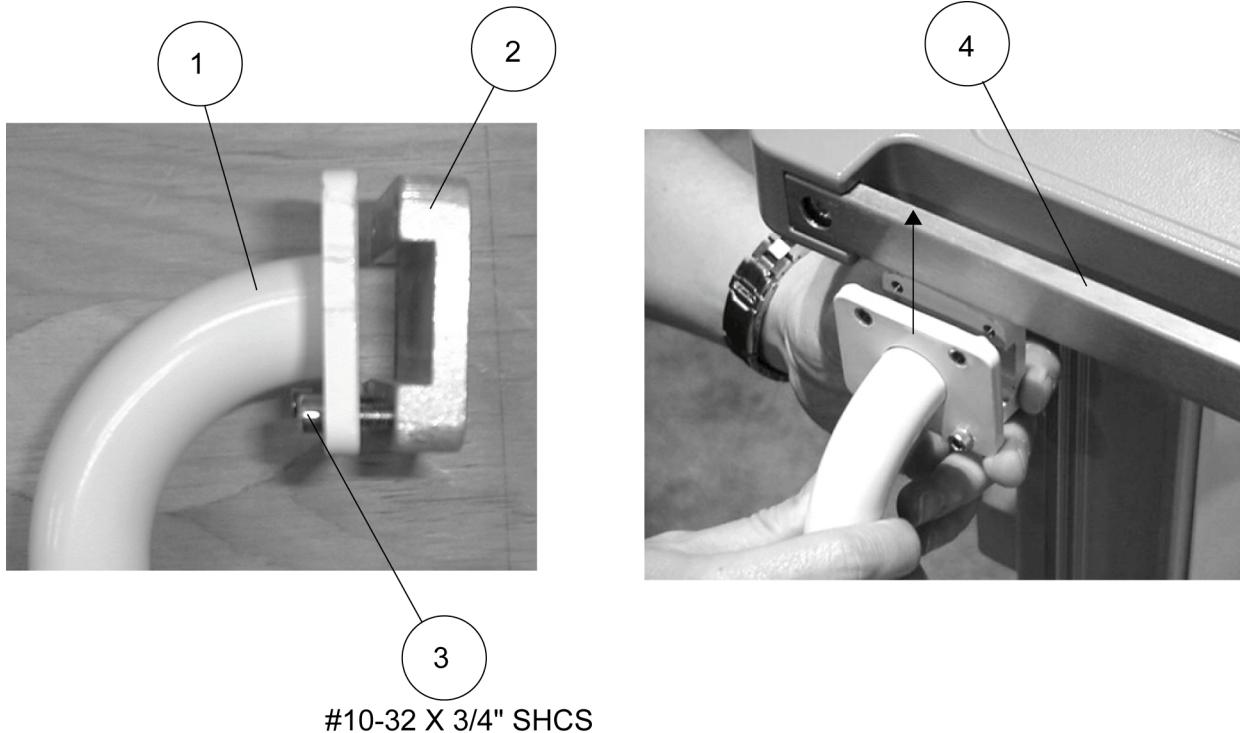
Handle Attachment to Fabius GS Draeger Rail
